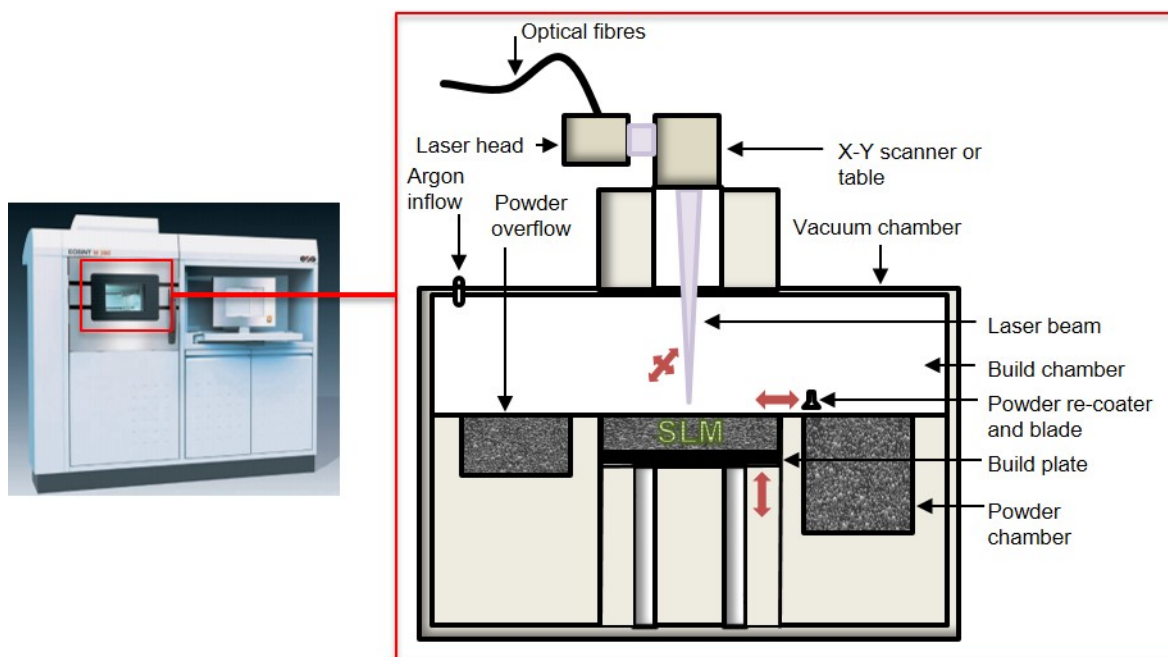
Schematic of SLM Equipment showing fiber laser with, build chamber, powder bunker, powder rake and build-in-progress, and photo of a representative SLM machine.
